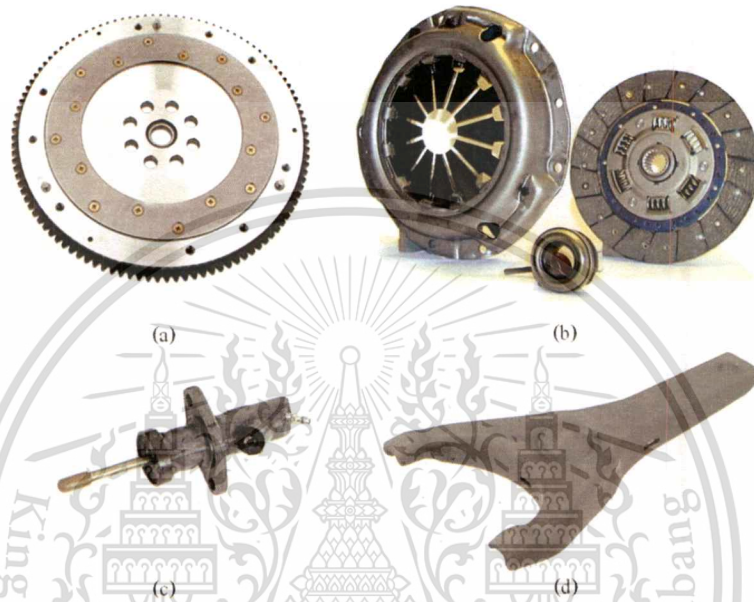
Clutch system components: (a) Flywheel, (b) Clutch set: including clutch cover, clutch disc, and bearing, (c) Clutch pump lower, and (d) Clutch fork
